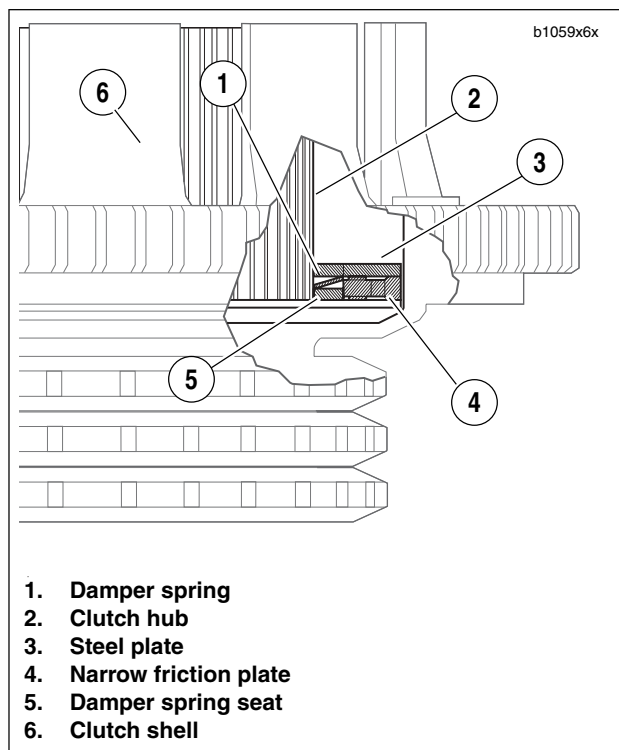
Clutch Pack Stack-Up (Cut-Away View)
